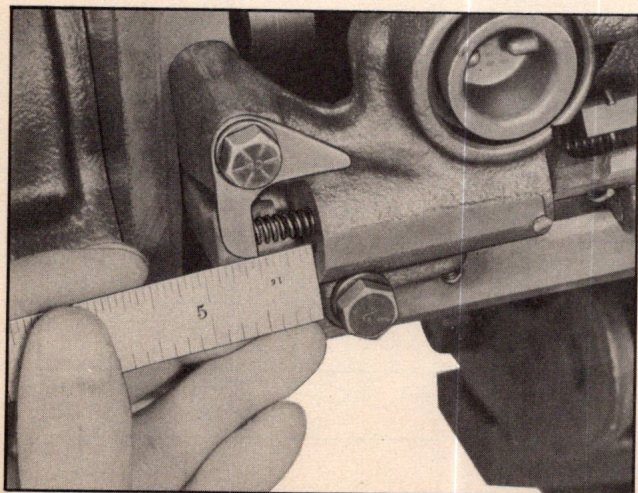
Checking Parking Blocker Return Spring Stop (Early type)
